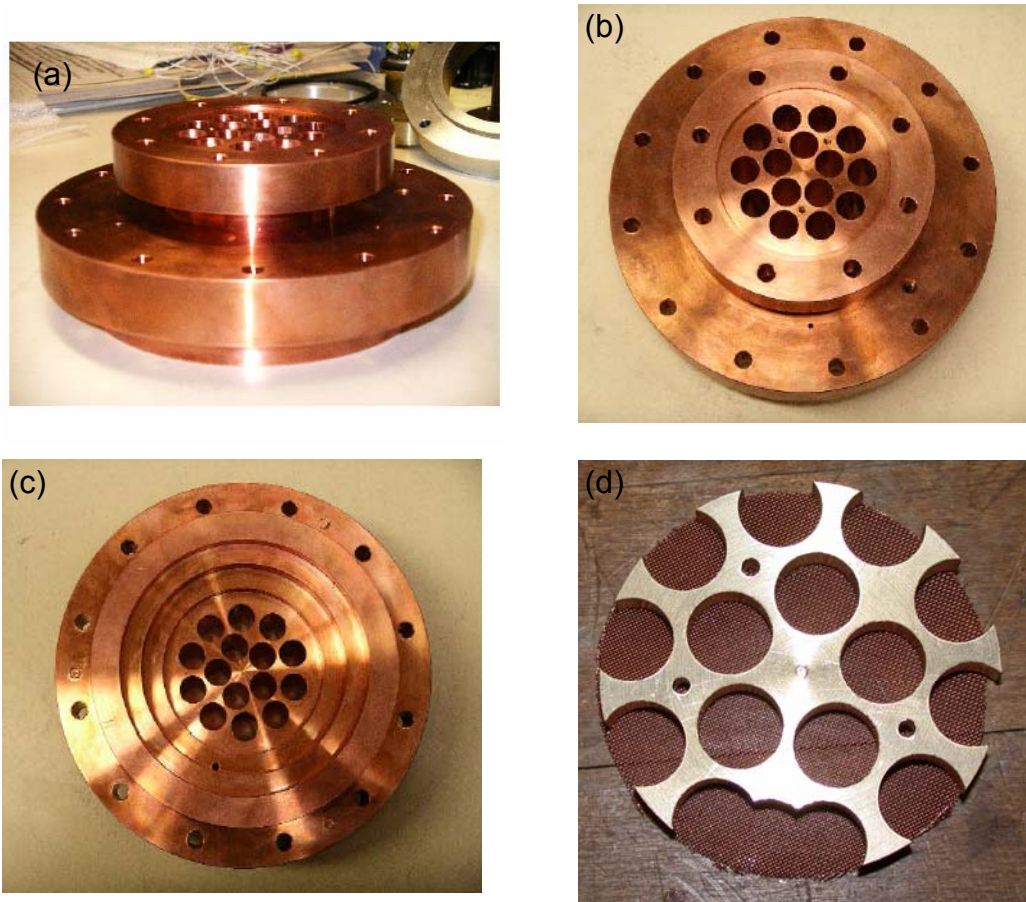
The upper regenerator flange (a), the regenerator tube (b), the assembly of flanges and regenerator tube (c), and the matrix (d) create the entire regenerator assembly.
